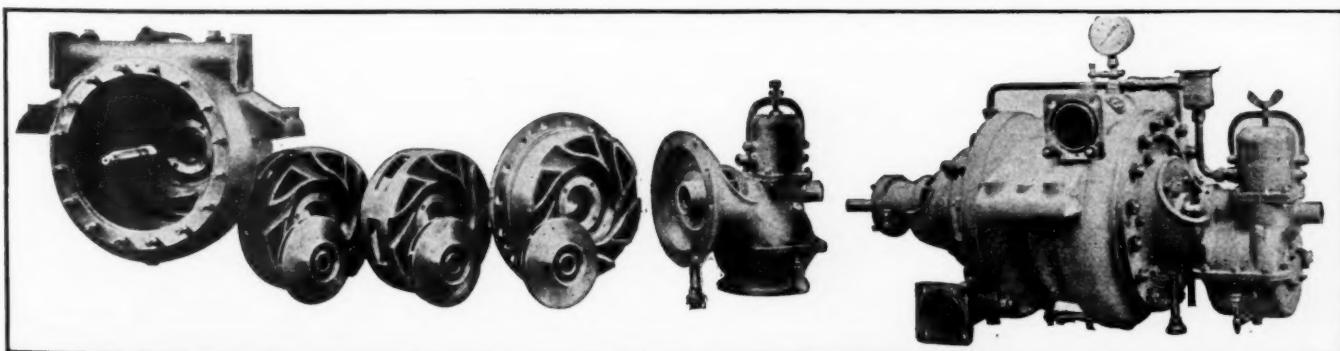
Parts of the Sulzer centrifugal pump dismounted and shown in sequence. To the right, complete pump assembled
